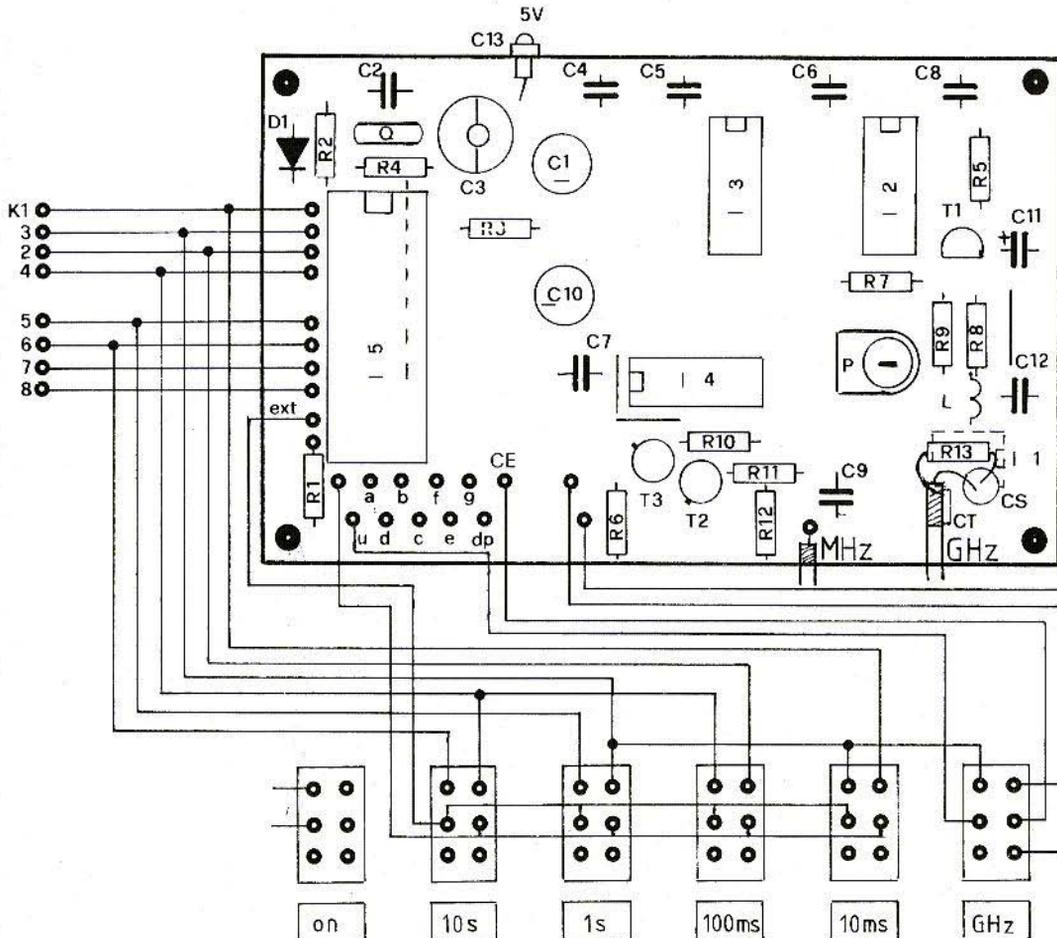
Component and wiring plan for the counter board DCØRZ 002
